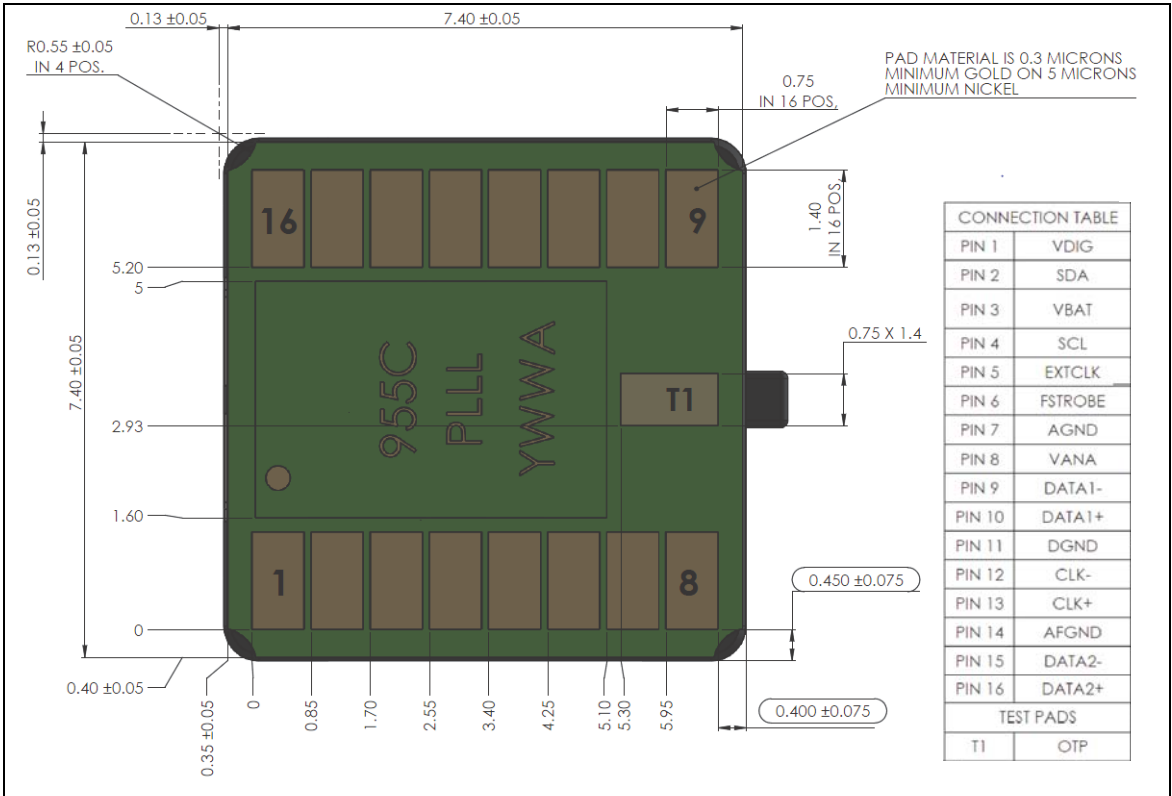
VB6955CM outline drawing in mm - sheet 4 of 6
